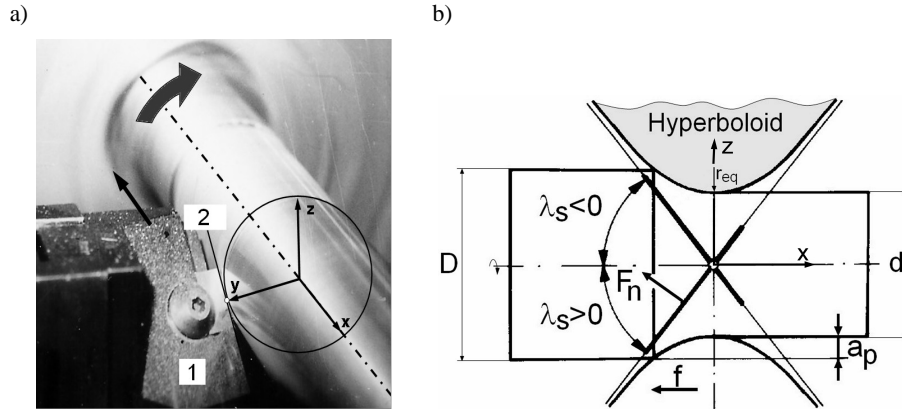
Free oblique turning using straight-edged tool: a) general view, b) scheme showing the sign of inclination angle and the formation of the machined surface; 1 – slant tool, 2 – inclined straight cutting edge, F_n – normal force, D – diameter of the workpiece, d – diameter of the machined surface, a_p – depth of cut
